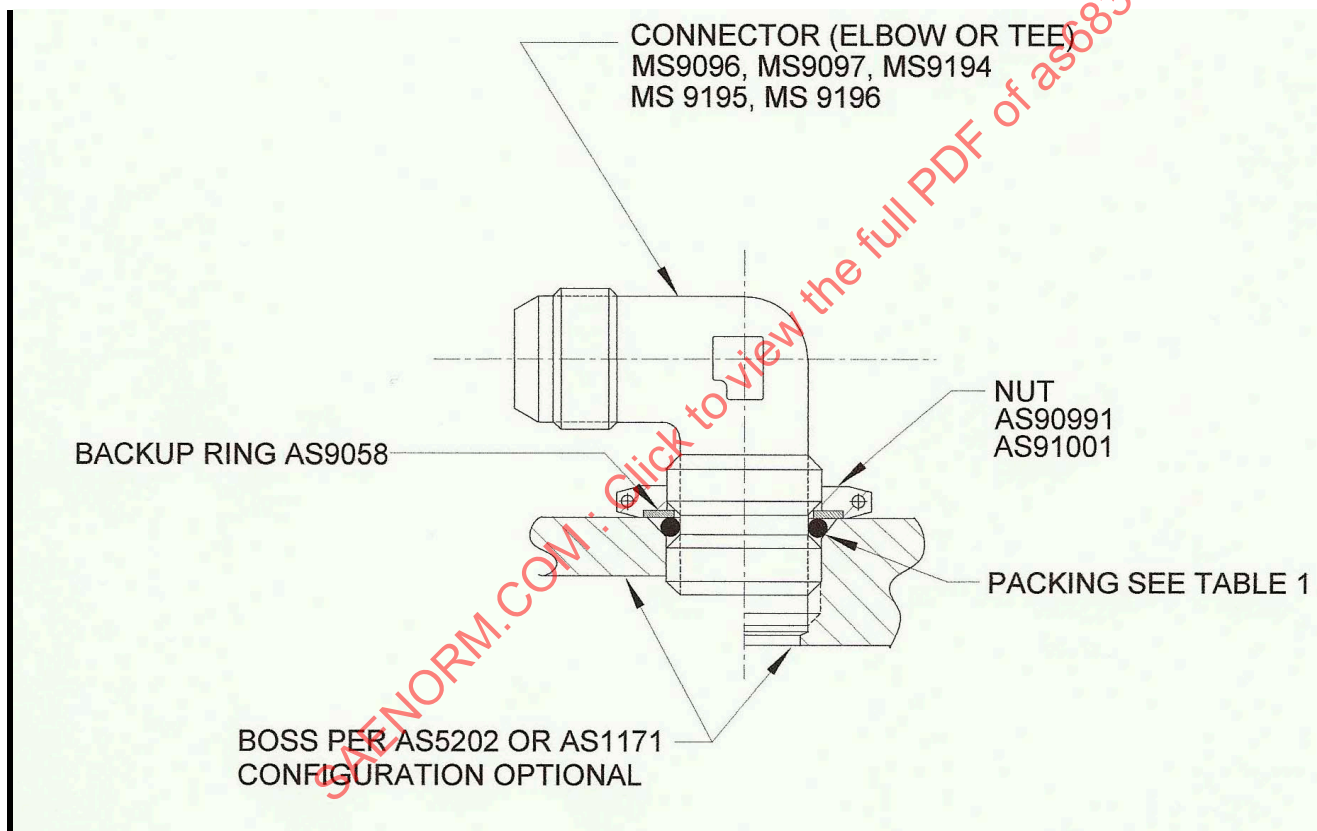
BOSS END CONNECTION, POSITIONED TYPE, WITH BACK-UP RING
